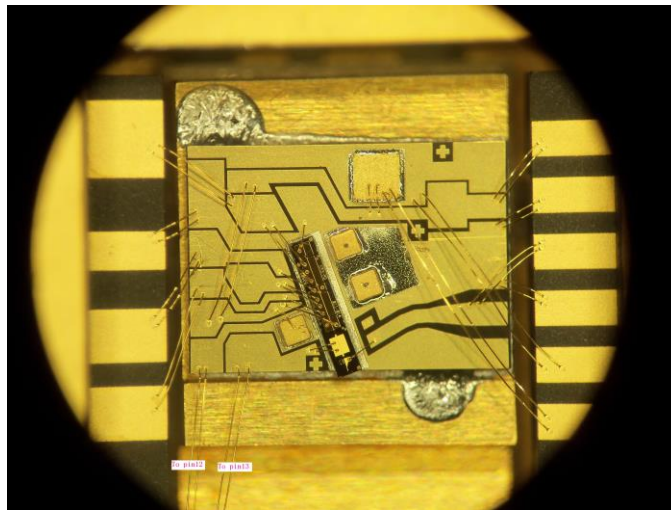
Internal view of the VT-DBR laser package; 25 micron bond-wires connecting the laser's package to the chip carrier and chip carrier to the laser chip are made using thermosonic bonding.
